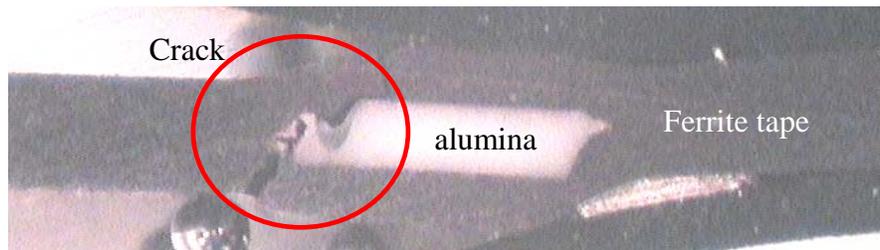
Cross-sectional view of a thin alumina strip sandwiched in LTCC ferrite tape after sintering.
